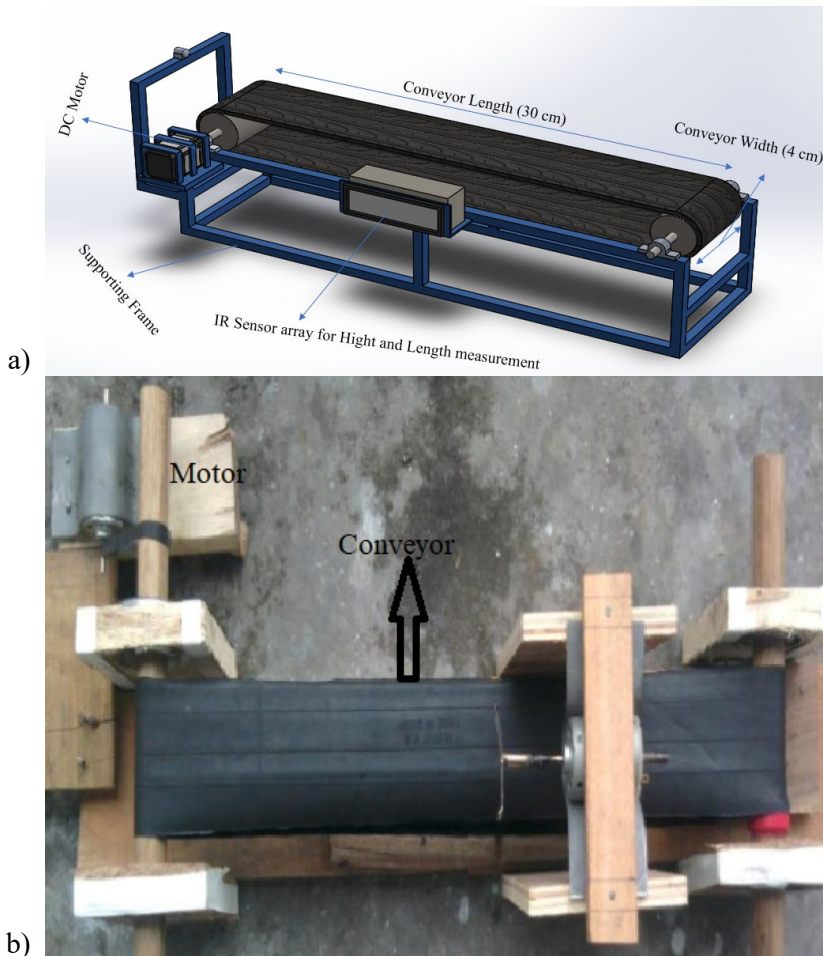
Proposed Conveyor belt sorter (a) CAD model (b) Fabricated model.
